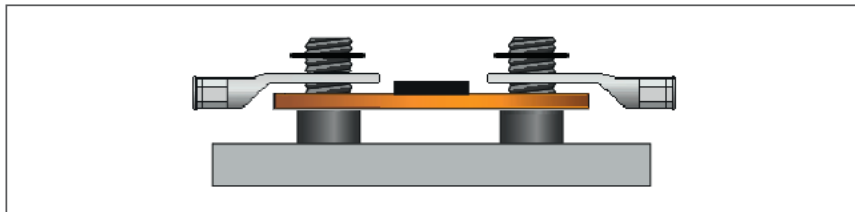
HV- power cables, placing the ring terminals and the washers on the threaded bolts
